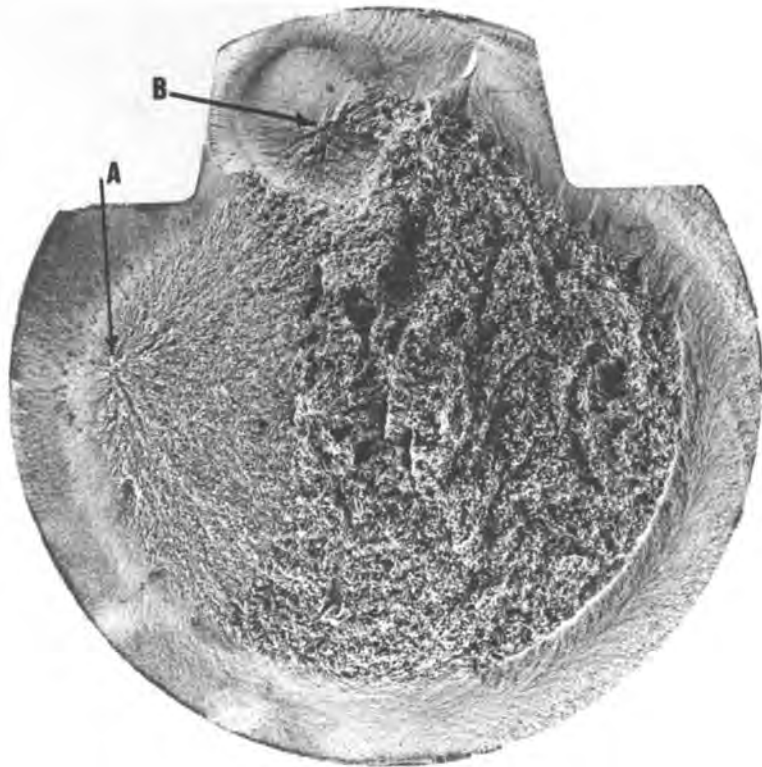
Fatigue fracture of a $3/4$ in. diam induction-hardened shaft of 1541 steel after fatigue testing in rotary bending. Fatigue fracture origins A and B were subsurface due to the steep induction-hardened gradient and lack of an external stress concentration. (See Fig. 9 in Chapter 6.) Fatigue crack A, the larger of the two, propagated through the core and case regions on the left side; then the shaft suddenly fractured in a brittle manner around the right side of the case. Note the chevron marks on the lower right pointing in a clockwise direction toward fracture origin A.
